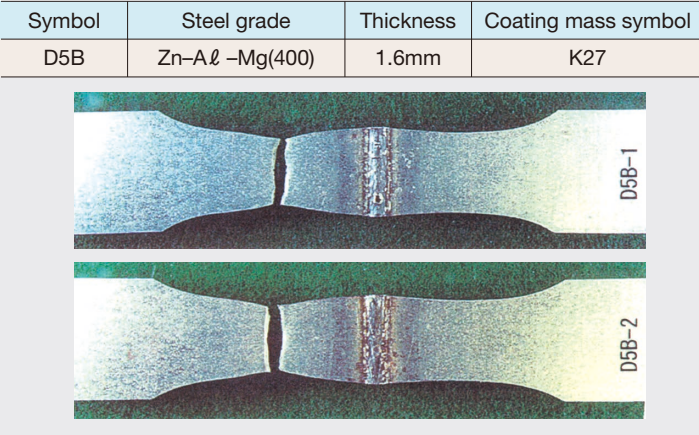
Fracture Conditions in Tension Tests for Lap Fillet Weld Joints (thickness: 1.6 mm)
